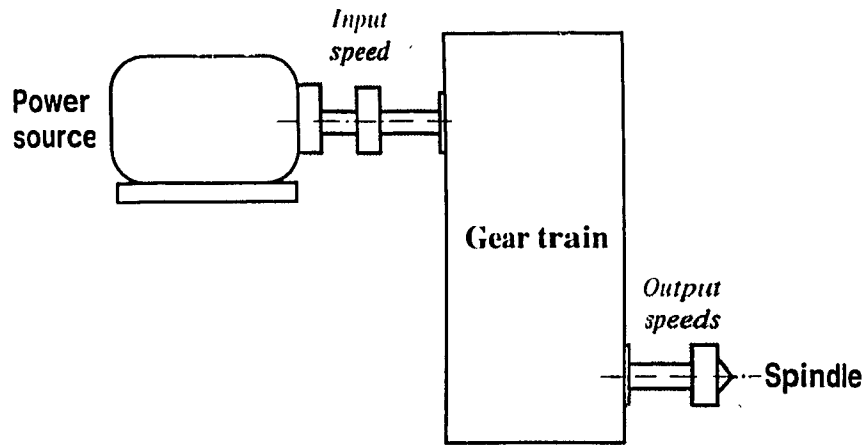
Location of the multi-speed gear train in an industrial machine tool
